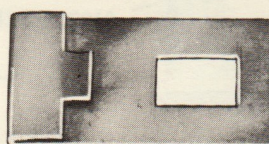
PLATE I : 4 PROJECTOR DOOR
